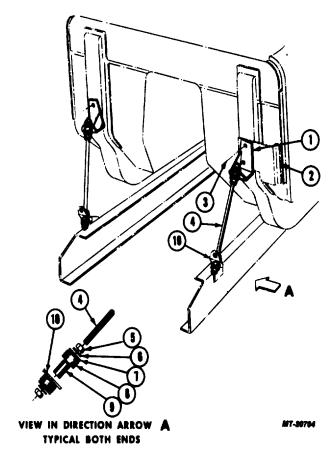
Cab Rear Mounting (230 cm 90 inch Wide Cab)
